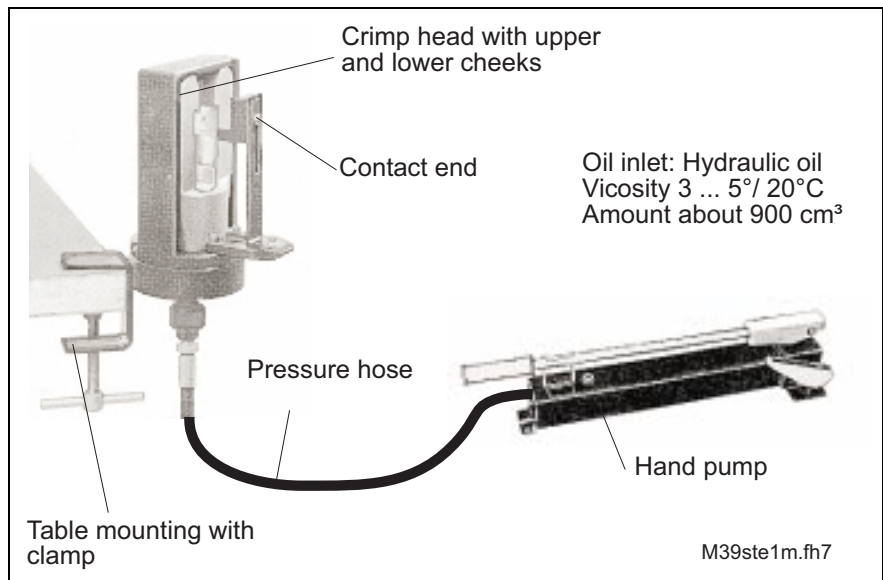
Crimping tool for power contacts INS0380 to INS0386
